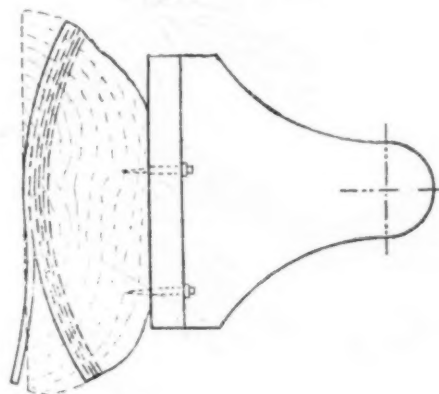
ONE METHOD OF CUTTING "HALF ROUND," SHOWING HOW A CROTCH CAN BE HALVED (ON A SAW) AND CUT INTO SIMILAR ADJACENT SHEETS TO REVEAL THE BEAUTIES OF HEART-CROTCH FIGURE
